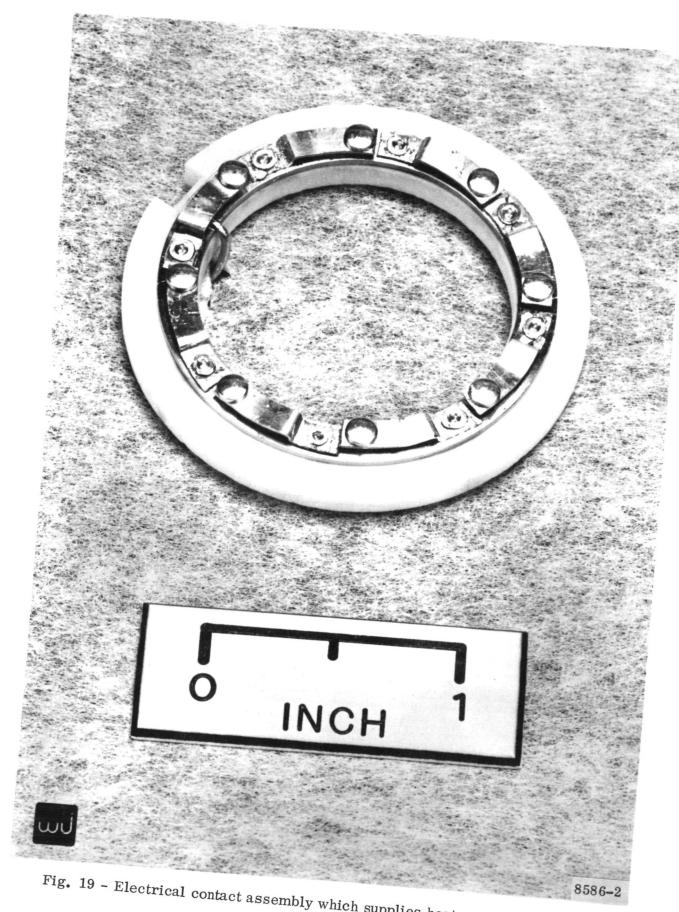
Electrical contact assembly which supplies heater power to cathode assemblies - 30 -
